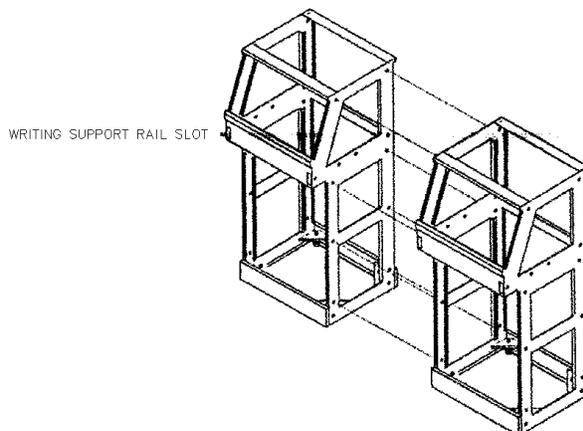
ASSEMBLY OF CONSOLE SECTIONS
